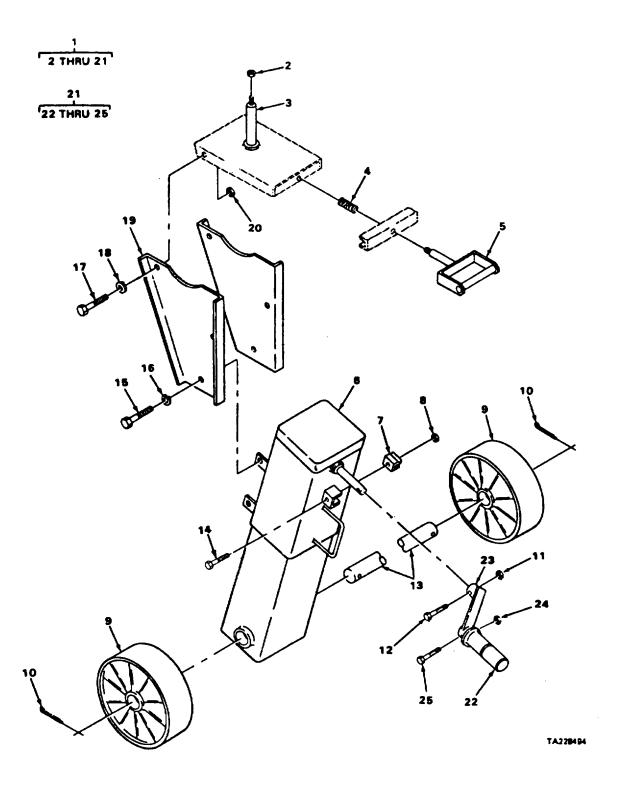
ADJUSTABLE CASTER ASSEMBLY.
